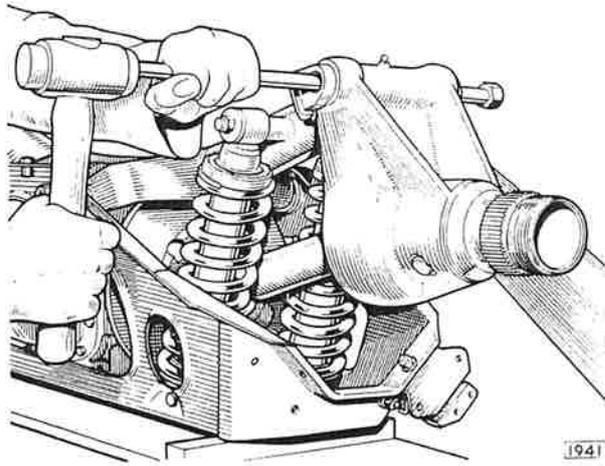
Drifting out the wishbone outer fulcrum shaft
